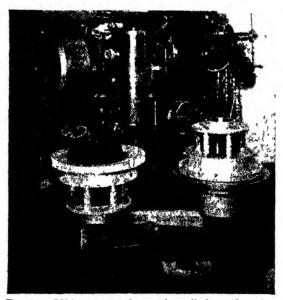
Lifting arm ready to raise cylinder and carrier.
